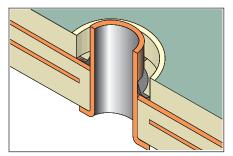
Solder the eyelet barrel to the exposed inner layer.
